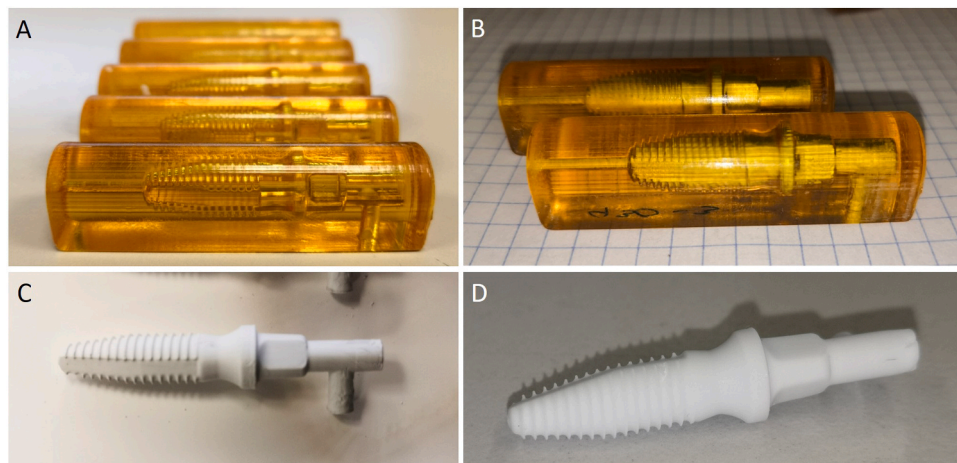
Production of dental implant prototypes: Sacrificial resin molds printed by DLP (A). Filled mold after injection molding with a commercial Al_2O_3 feedstock (B). Green part after dissolving the sacrificial mold in 0.1 M NaOH (C). Sintered part (D).
